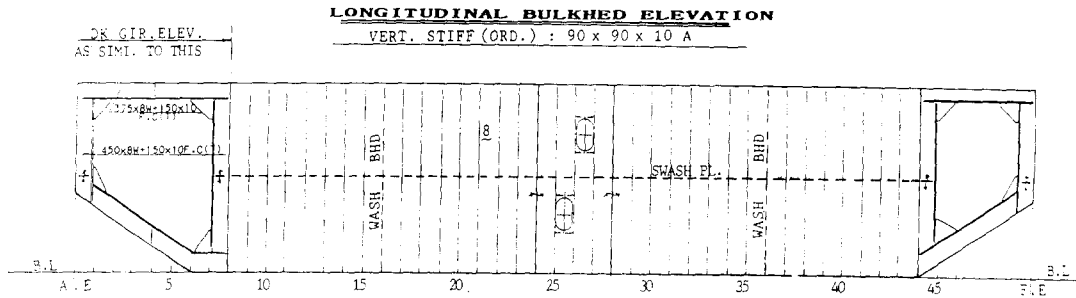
Longitudinal Bulkhead elevation of the Double Fish pool type.
